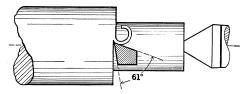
The cutting edge of the cutter bit should be placed exactly on center for thread cutting, taper turning, machining brass, copper, etc.
